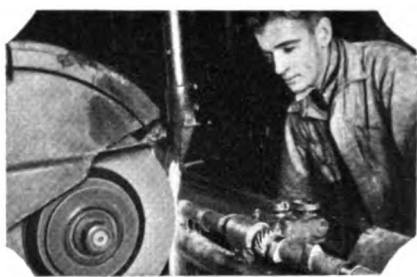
Finish Grinding the Cams on a Norton 16x50 in. Cam Grinding Machine
